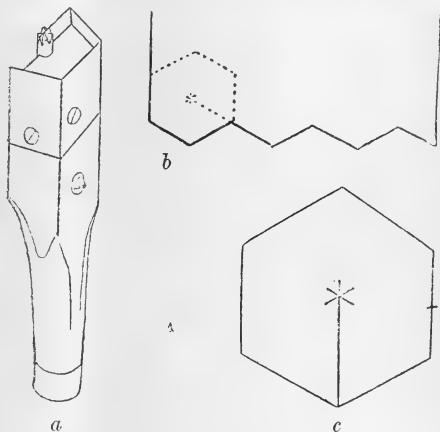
a*, Tool for cutting tarred paper pads; *b*, diagram showing how tool is used, the dotted line showing position of edge of tool; *c*, tarred paper pad in outline. *a*, *b*, One-fourth natural size; *c*, one-half natural size.
